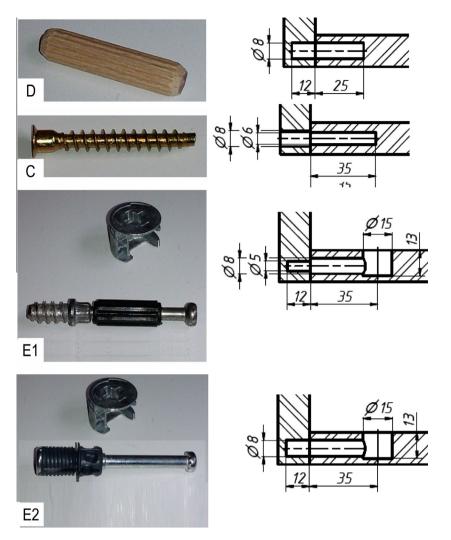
Kinds of the applied joints: D - beech dowel; C - "konfirmat" screw; E1 - eccentric coupling with threaded mandrel; E2 - eccentric coupling with expanding mandrel.
